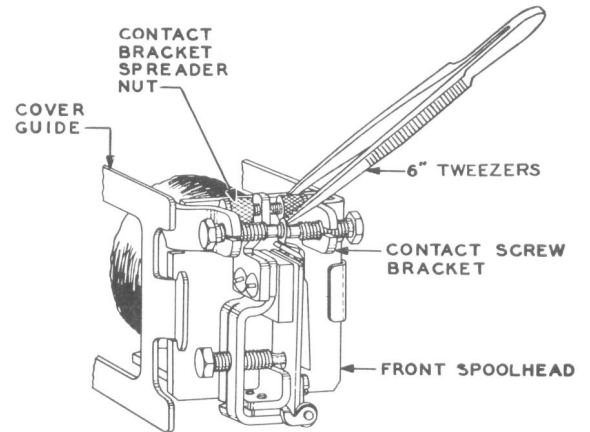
Method of Adjusting for Contact Screw Bracket Position
